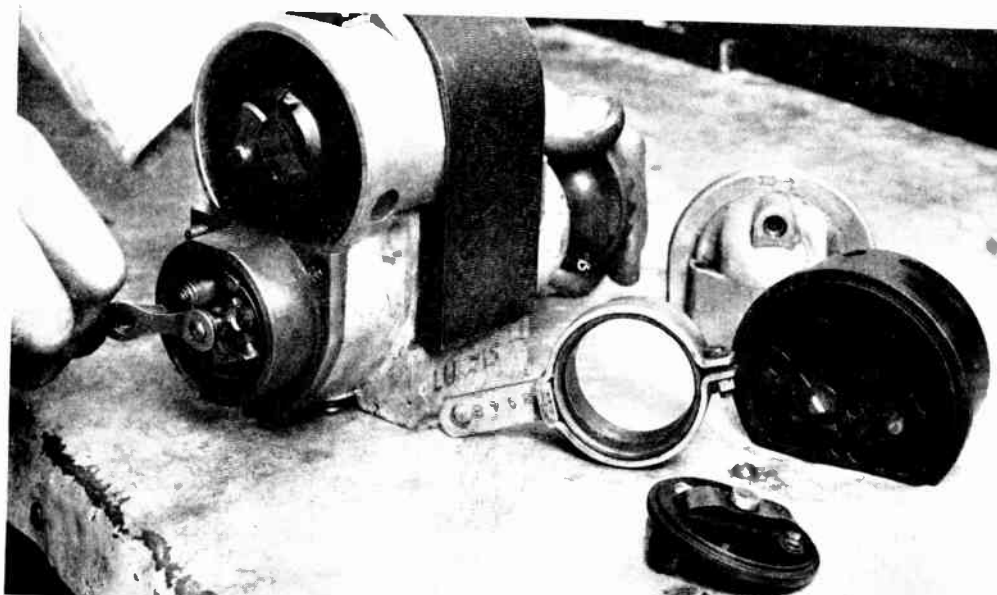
DISMANTLING A MOTOR CAR MAGNETO.
